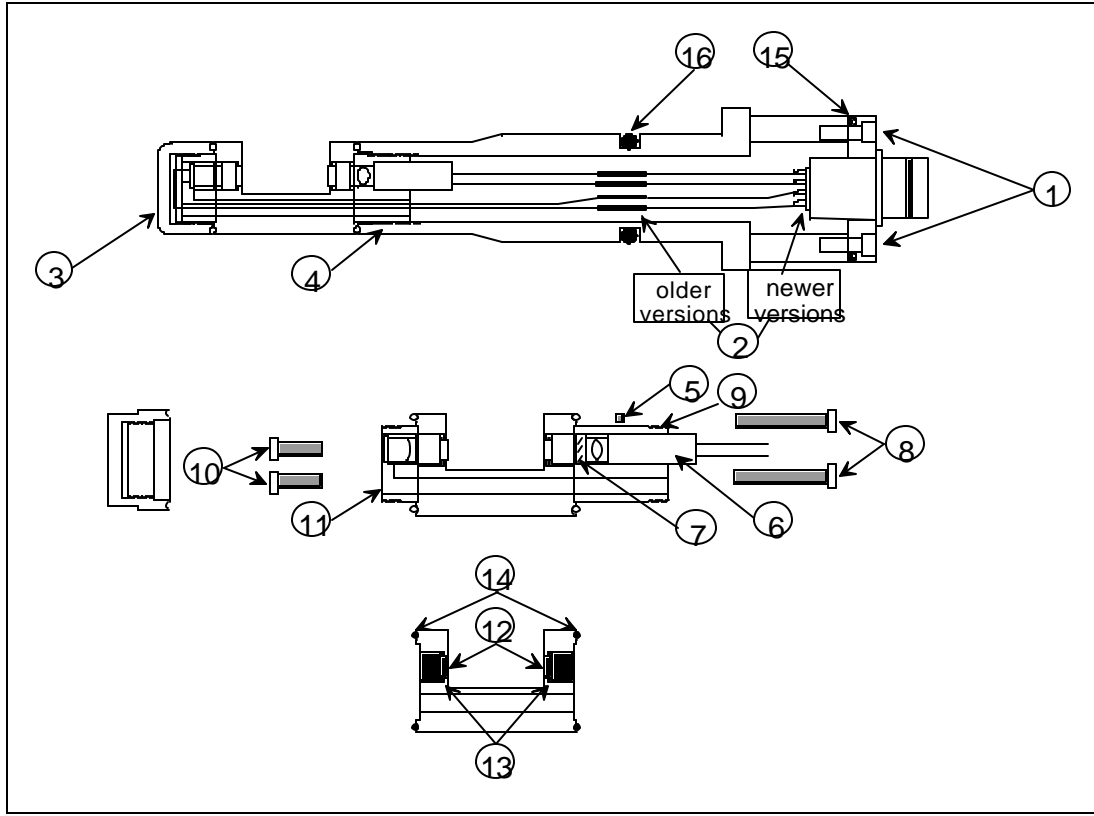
Cell Probe Assembly/Disassembly Drawing
